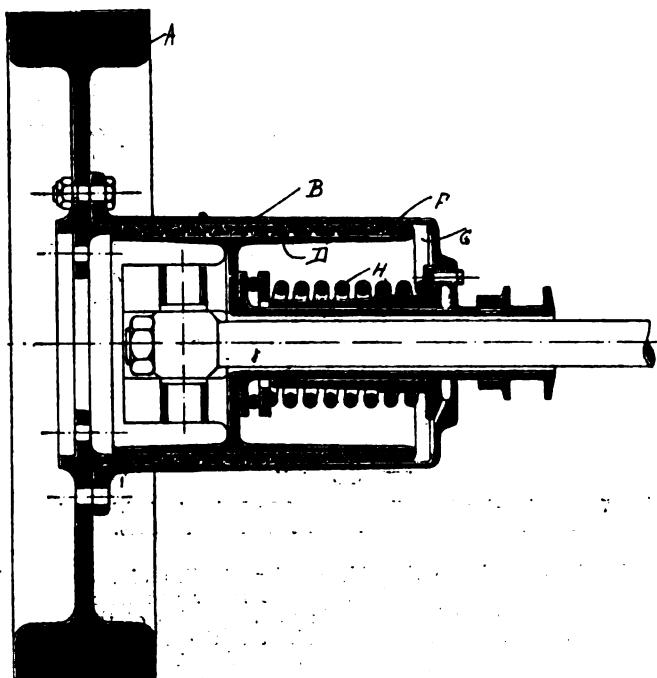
Sectional View of Horch new Multiple Metal-to-Metal Ring Clutch.
